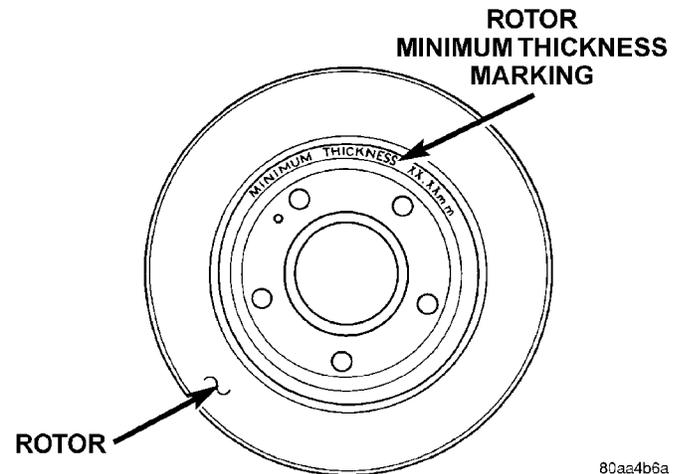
Minimum Brake Rotor Thickness Markings (Typical)
